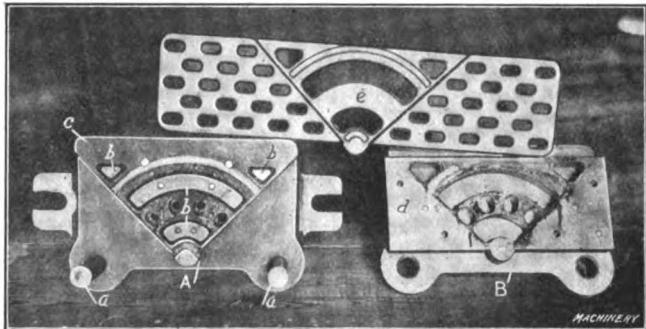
Punch and Die used in drawing up the Edges of the Perforations in the Center of the Miter-box Frame
